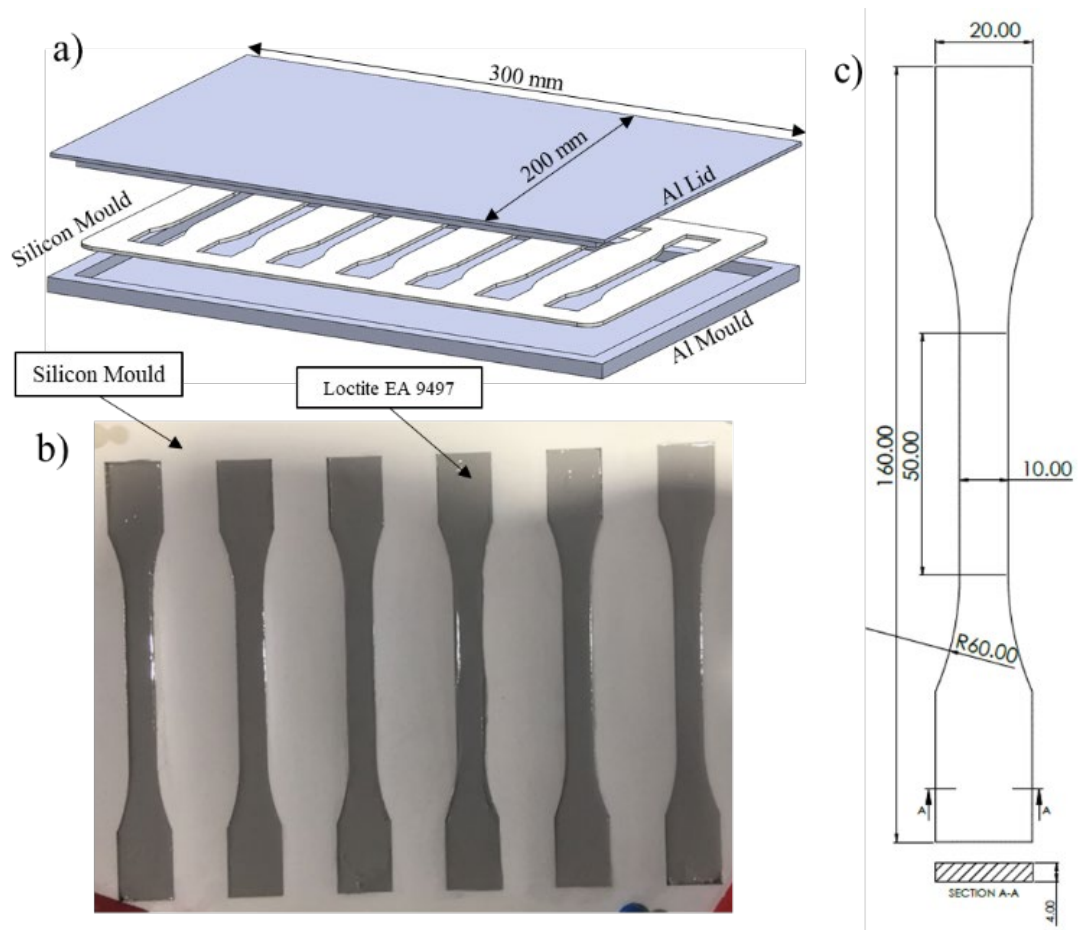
(a-b) Mould for bulk epoxy adhesive tensile specimens (c) Standard bulk adhesive test specimen from EN ISO 37:2012 (Units in mm)
